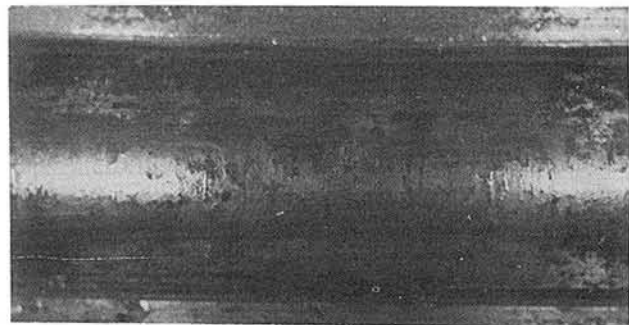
Close-up view of drive-end bearing outer race. Clear evidence of bearing damage.
